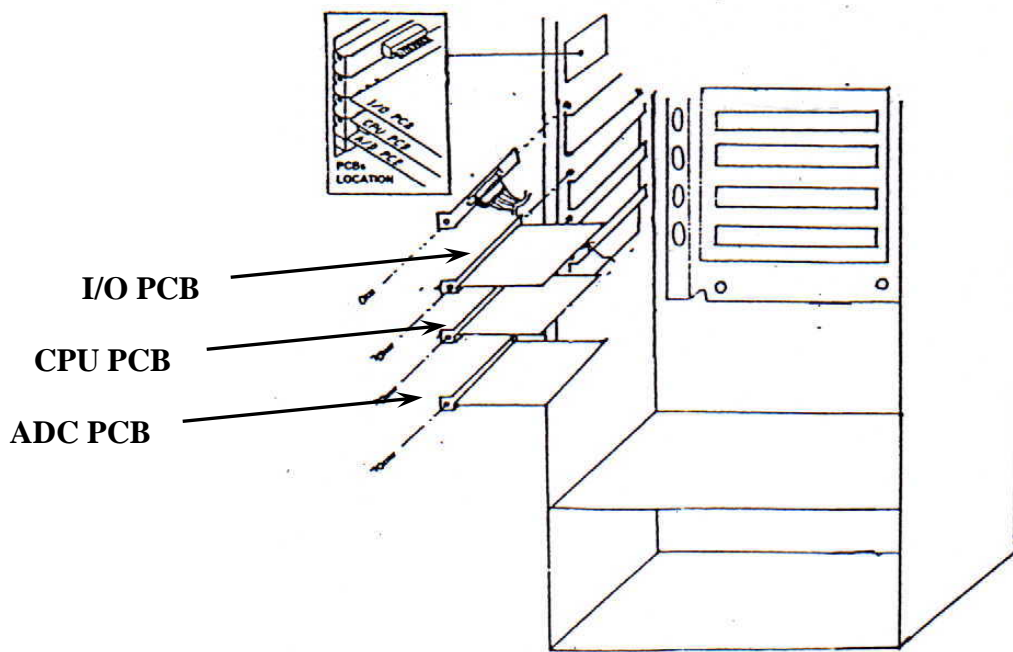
I/O PCB, CPU PCB and ADC PCB Replacement.
